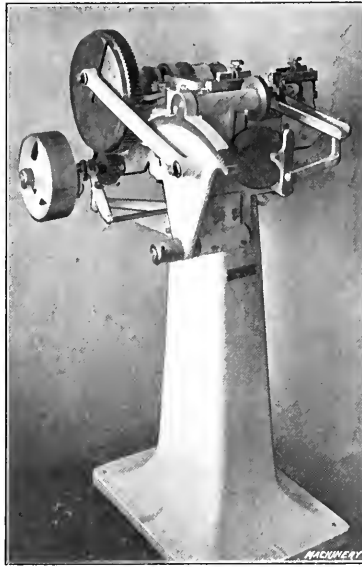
A Spring Winding Machine which receives Wire from the Coil and completes Springs at the Rate of 150 per Minute
